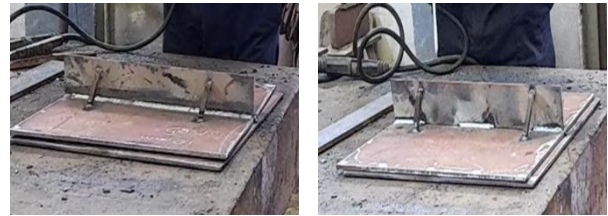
Sample of welded specimen using with continuous (left) and intermittent chain (right) fillet welding
